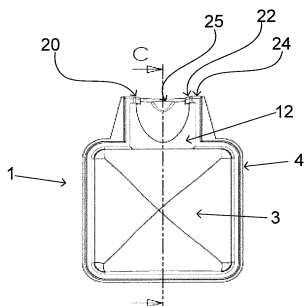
Drawing of patent WO2014051495A1 Dispensing mechanism for fluids
